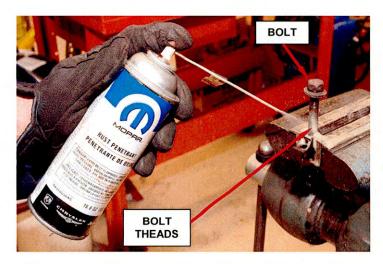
Clean and Lubricate Exhaust Pipe Flange-to-Exhaust Manifold Retaining Bolts
